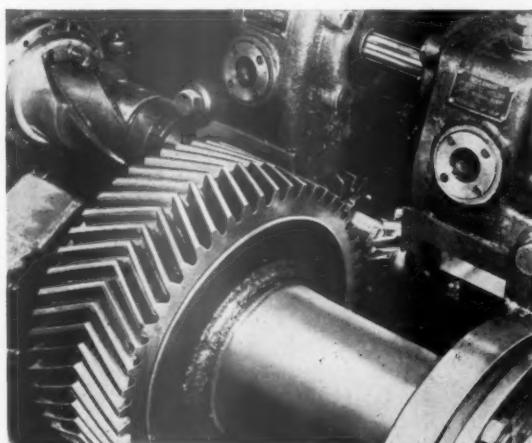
Generating continuous tooth double helical gear by Sykes gear shaping process.
